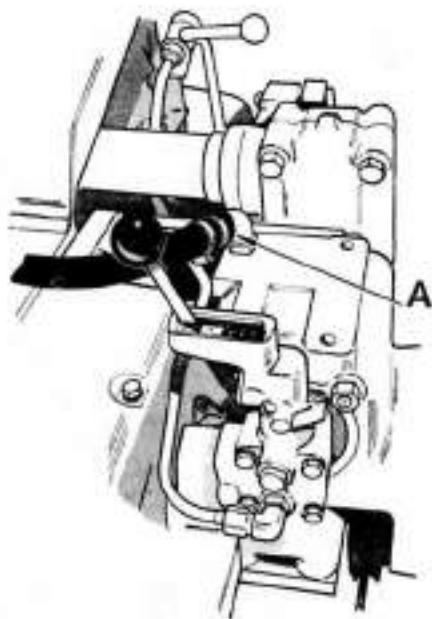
/8. HYDRAULIC RETURN CONNECTION
